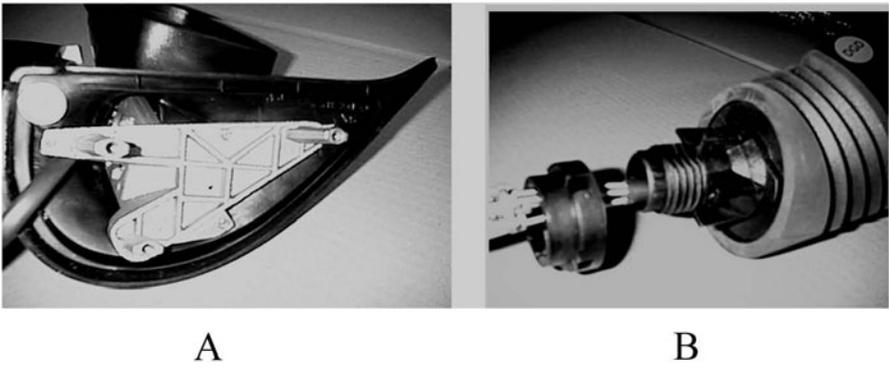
A) cast aluminum bracket with 3 screws seats; B) threaded ring nut fitting.
